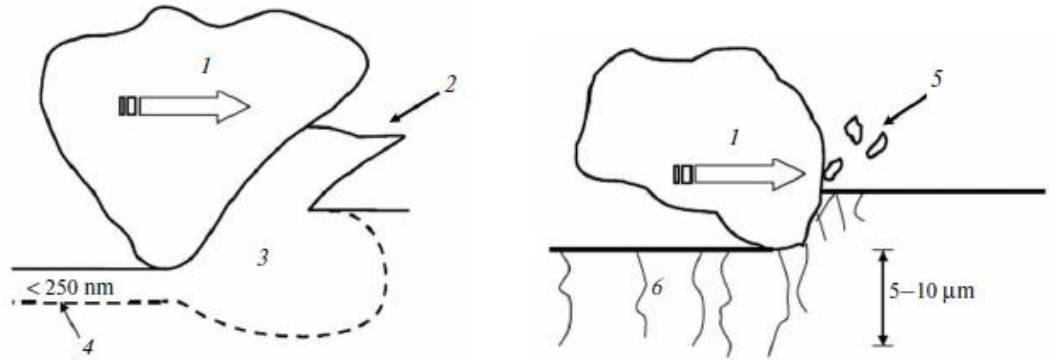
from [6]: Ductile mode machining (left) and brittle mode machining (right). According to [6], “(1) abrasive grain, (2) ductile removal of chips, (3) metal phase, (4) transformed amorphous layer, (5) brittle chips, (6) microcracks.”
